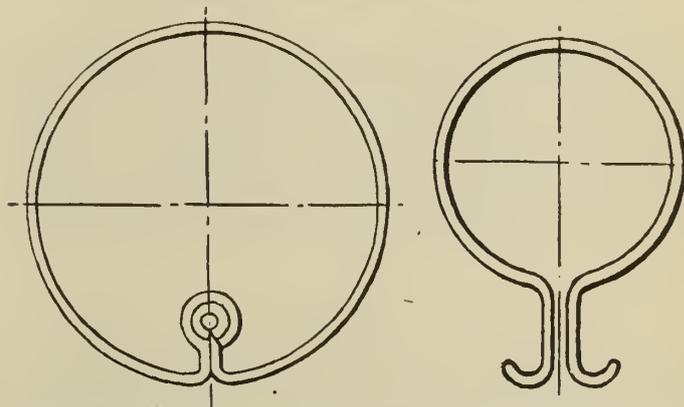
Section Main Longitudinals R.101. Figure No. 32.—Section Ridge Girders of R.101.
